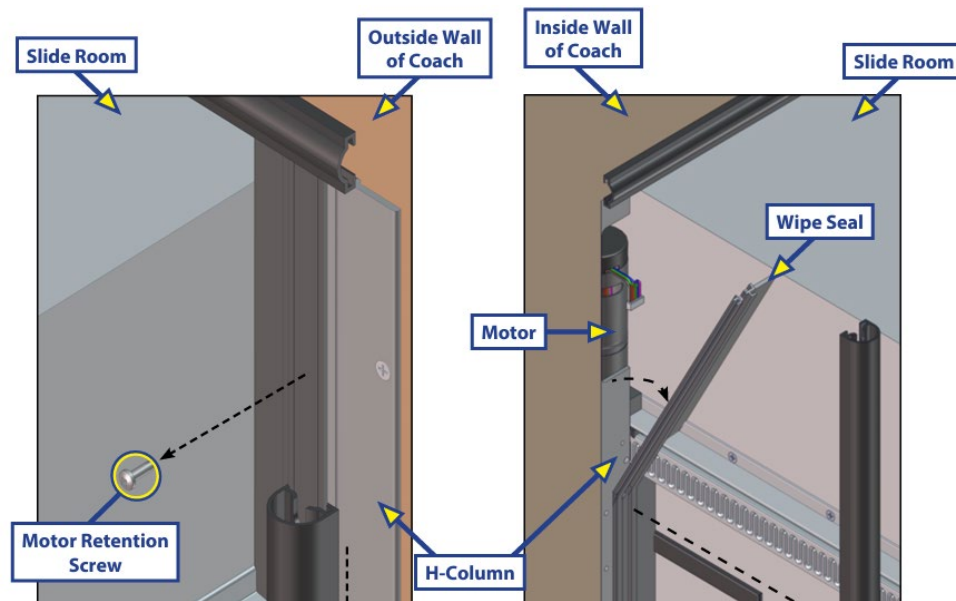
In-Wall system overview, showing relevant positions for motor disengagement.
